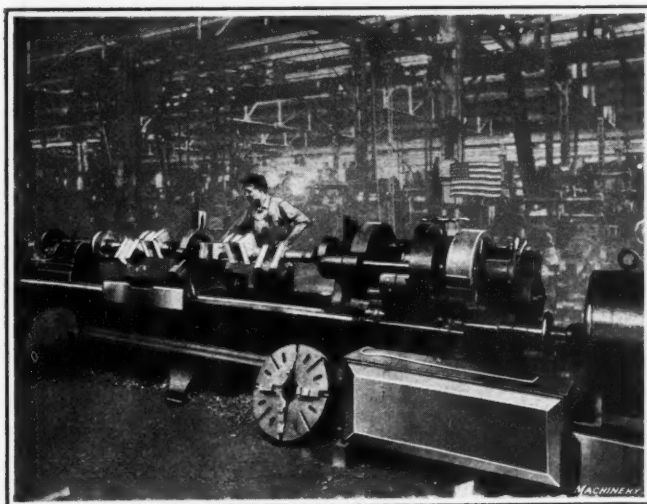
Turning Six-throw Crankshafts for 120-horsepower Engine
